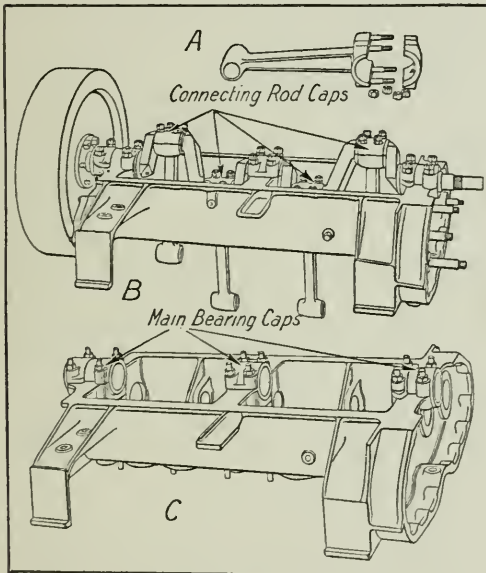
Showing method of supporting crankcase to provide ready access to connecting rod and crankshaft bearings
